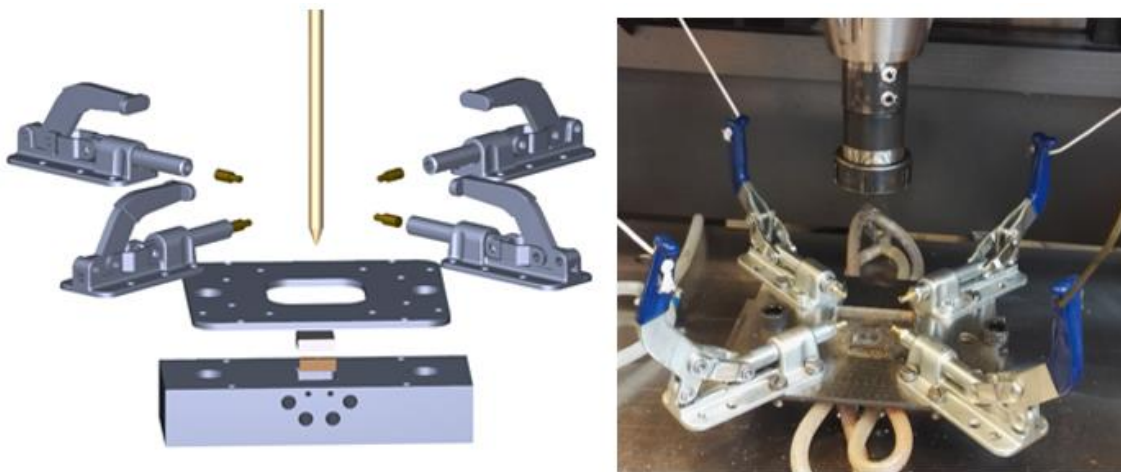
Supporting Guide to produce longer tube (200mm consumable rod). 3D CAD model exploded view in left side and picture from test in right side
